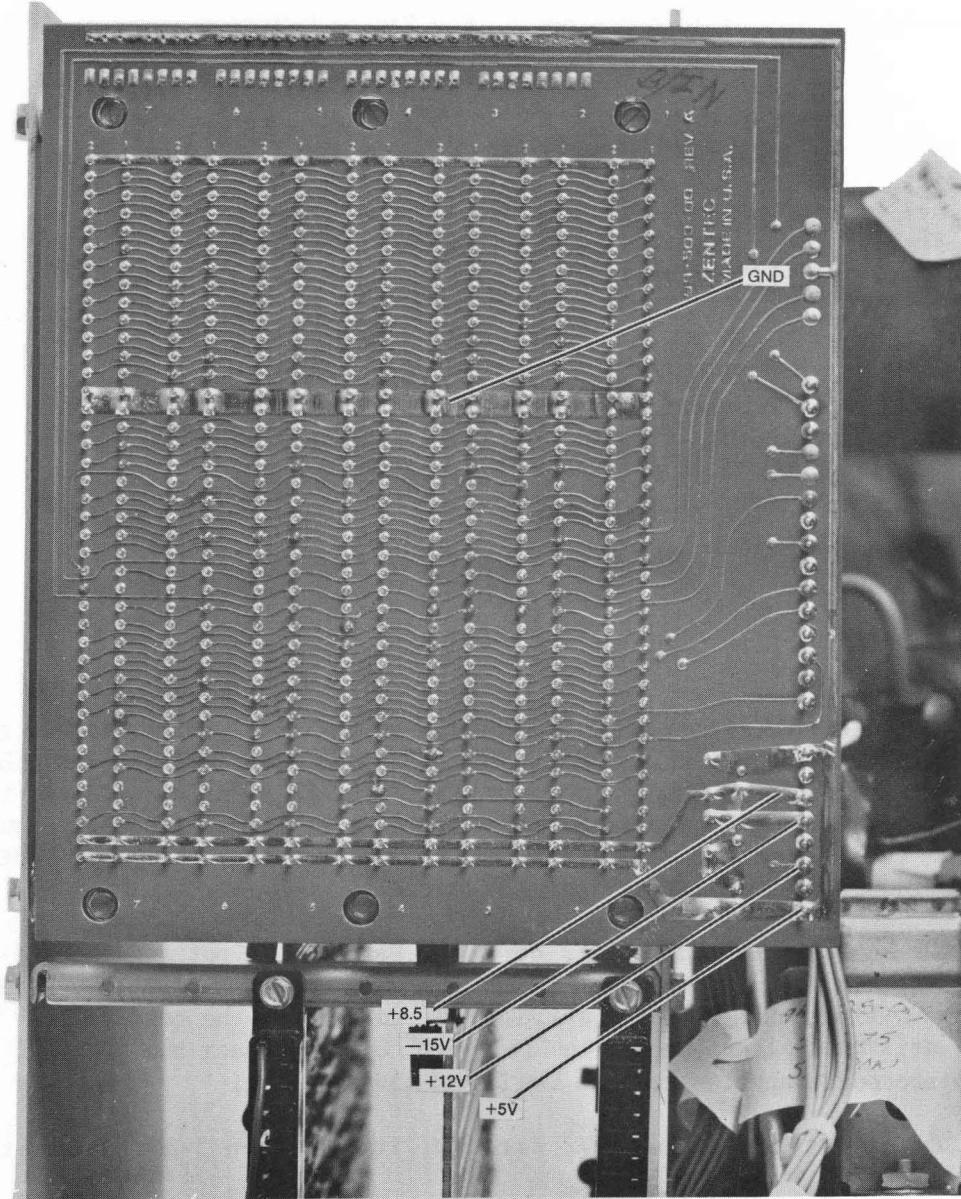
MOTHERBOARD PCB SHOWING VOLTAGE TEST POINTS
